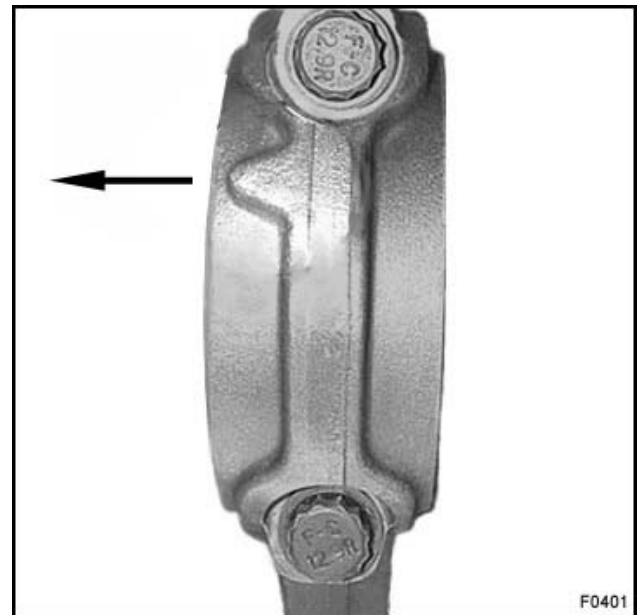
Connecting rod cap with M12 connecting rod cap bolts (protrusion points to front of engine)
